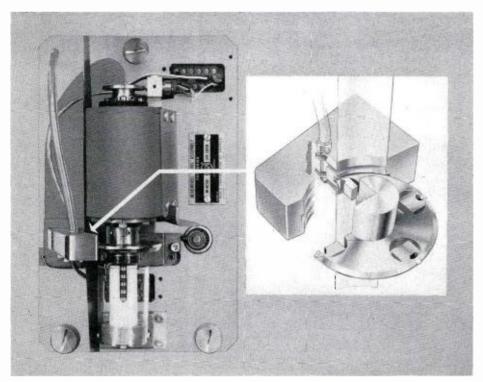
Cut-away view of the tape shoe showing slot construction and relationship of shoe to headwheel.
